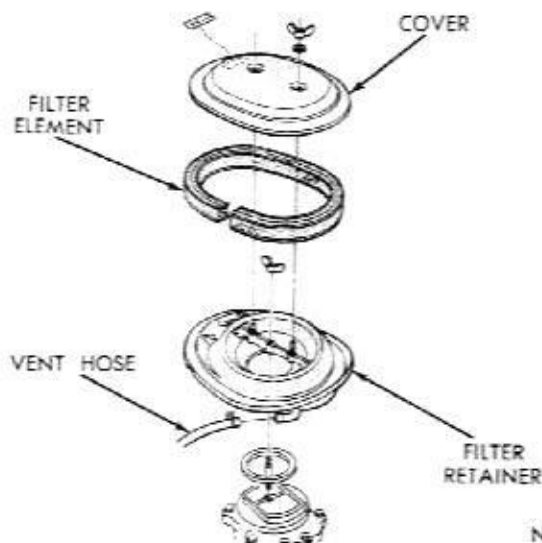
Carburetor Air Cleaner (Fresh Air System)
